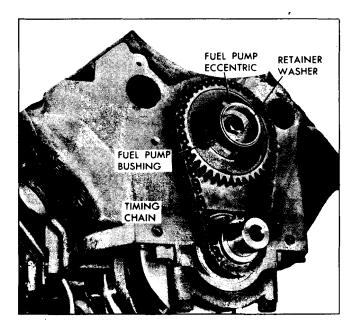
Fuel Pump Drive - All Except 307 Engine
